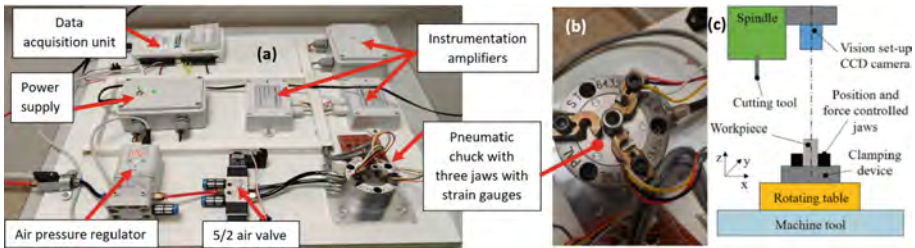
The high-precision clamping system, (a) Experimental set-up for force measurement and force control, (b) Pneumatic chuck with three jaws equipped with strain gauges, (c) Clamping system on the machine tool with the vision set-up.
